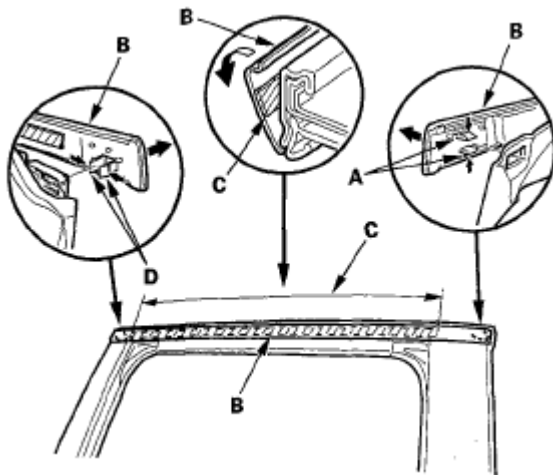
Identifying Rear Clip, Door Outer Molding And Double-Sided Adhesive Tape
